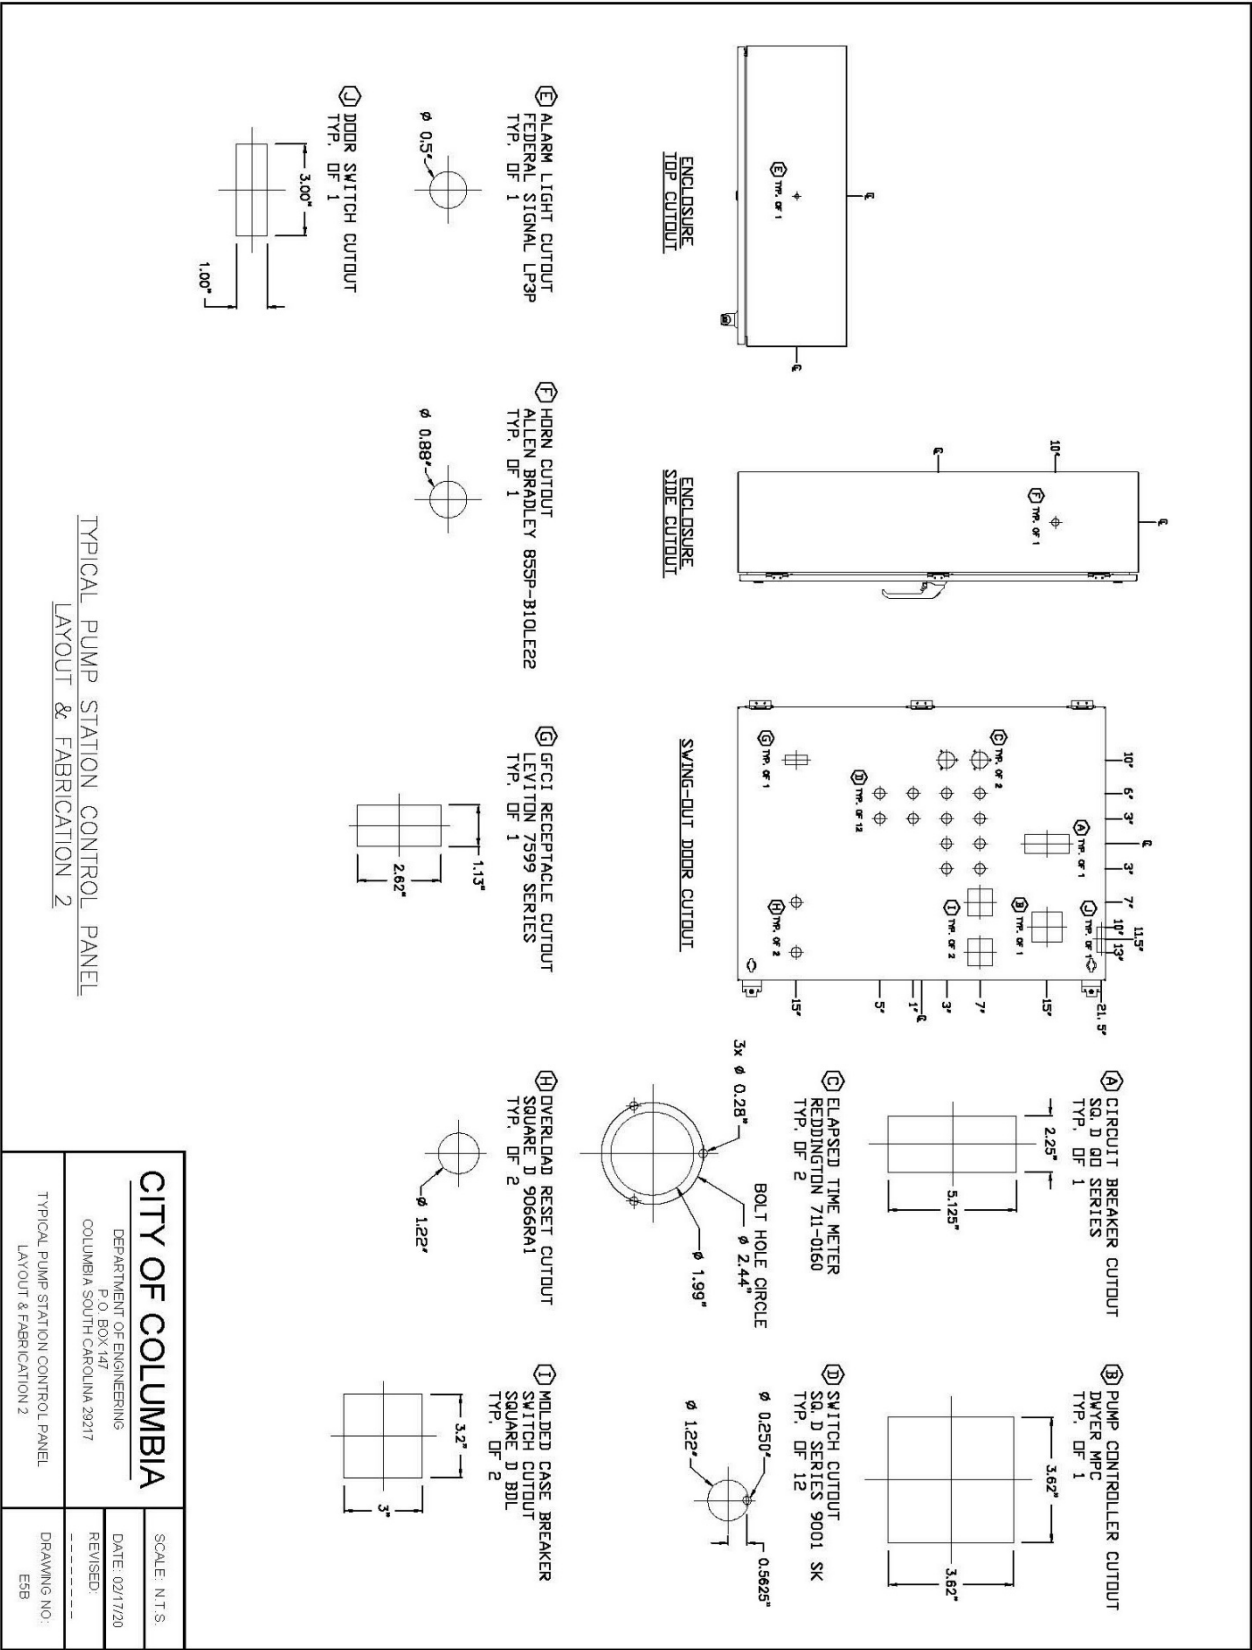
E5B - Typical Control Panel Layout & Fabrication 2
